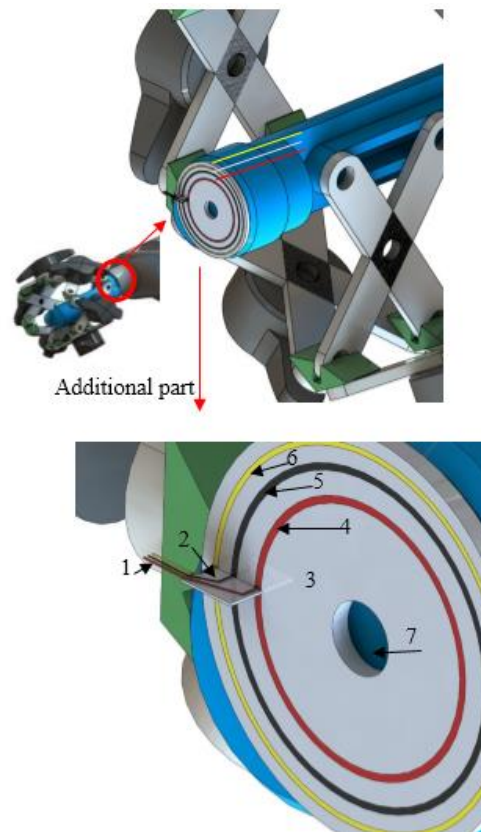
The additional part to convey power and PWM signal to the adjustment motor
